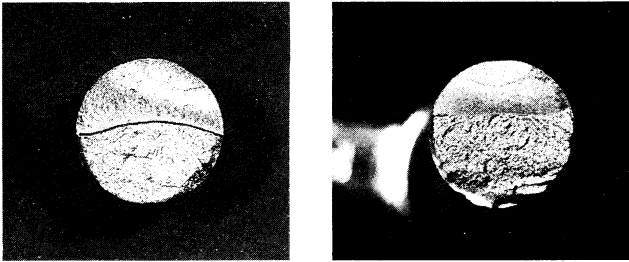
Fracture surface of two specimens: rotating and reversed bending with steady torsion.
